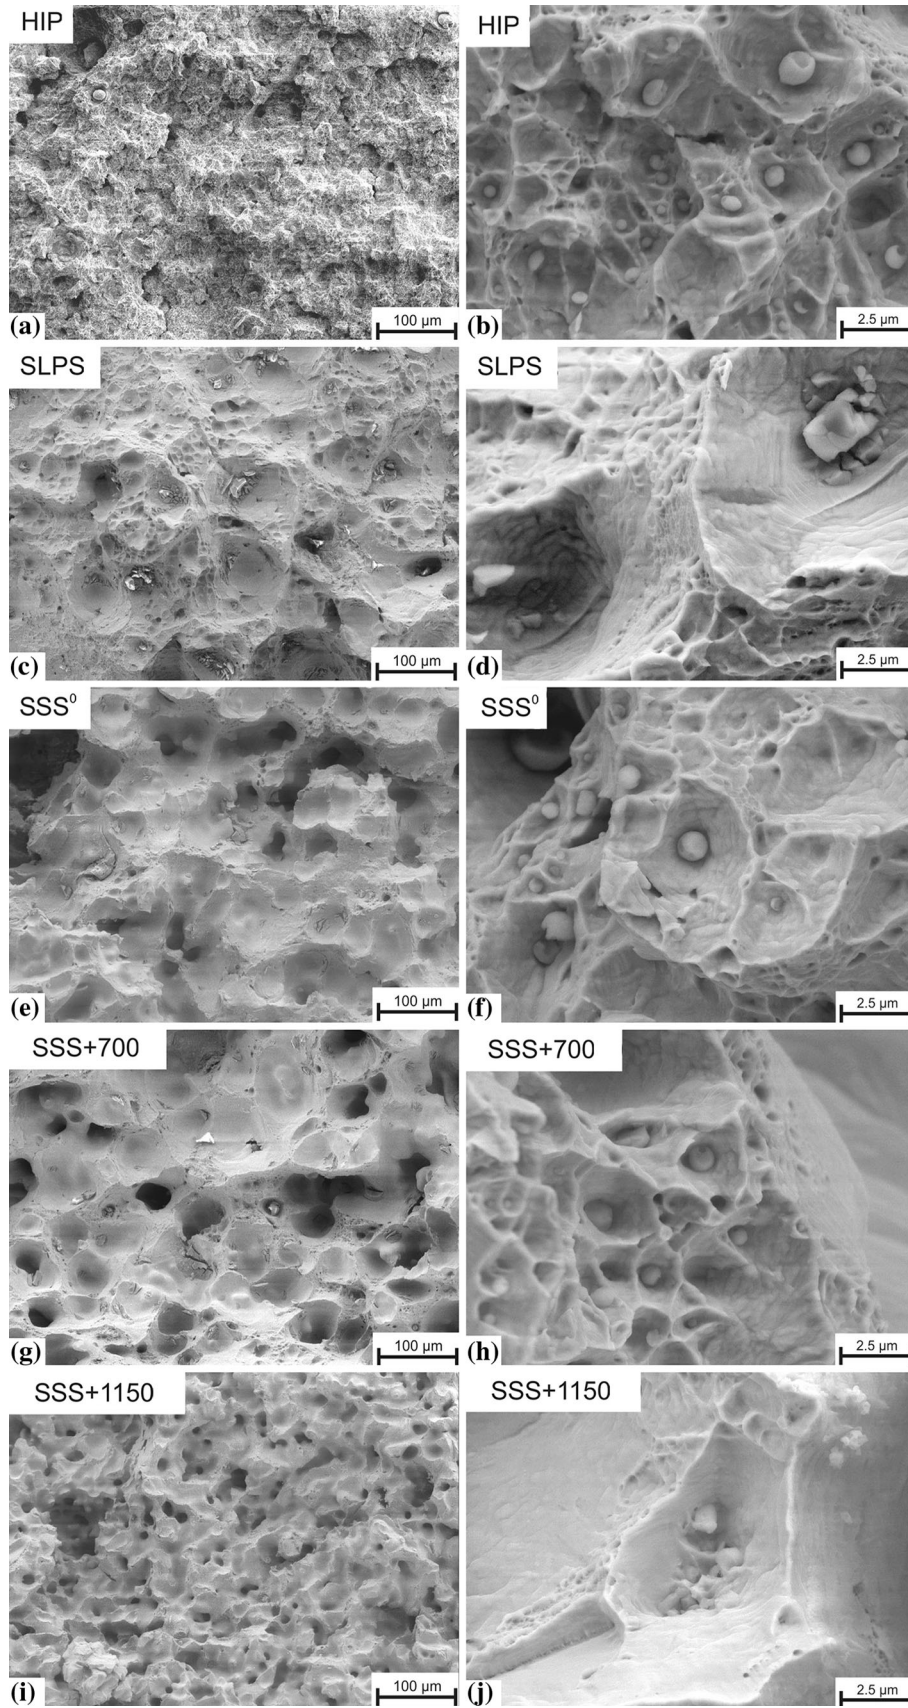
SEM images of fractured surfaces of investigated specimens.
